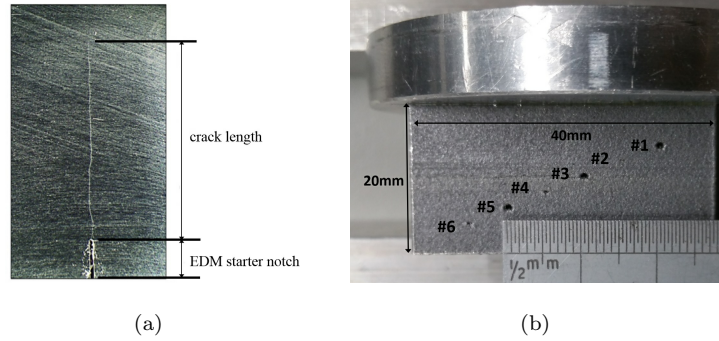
(a) An Aluminium sample containing a fatigue crack grown under 3-point bending tests [22], and (b) additive manufactured (AM) Aluminium specimen containing six volumetric defects [23]. In (b), the array was attached to the build plate (top) which has a smooth surface.
